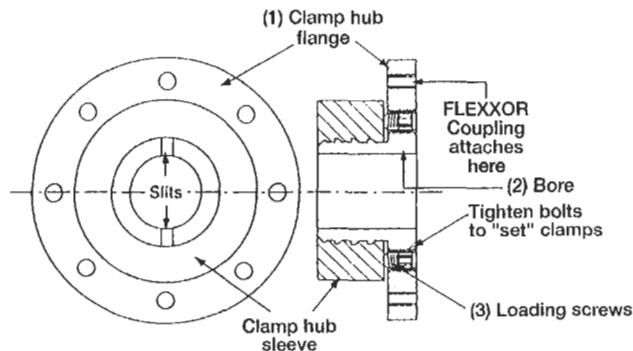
Anderson hub clamp for attaching coupling hubs to cylindrical shaft ends.
